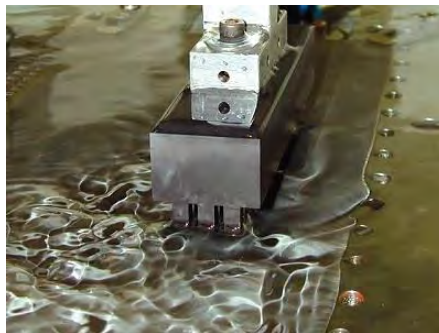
Electrical Discharge Machining (Die Sinking)
